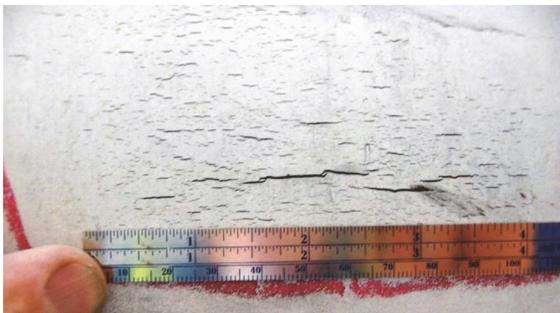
Example of a Crack Cluster Caused by Stress Corrosion Cracking
